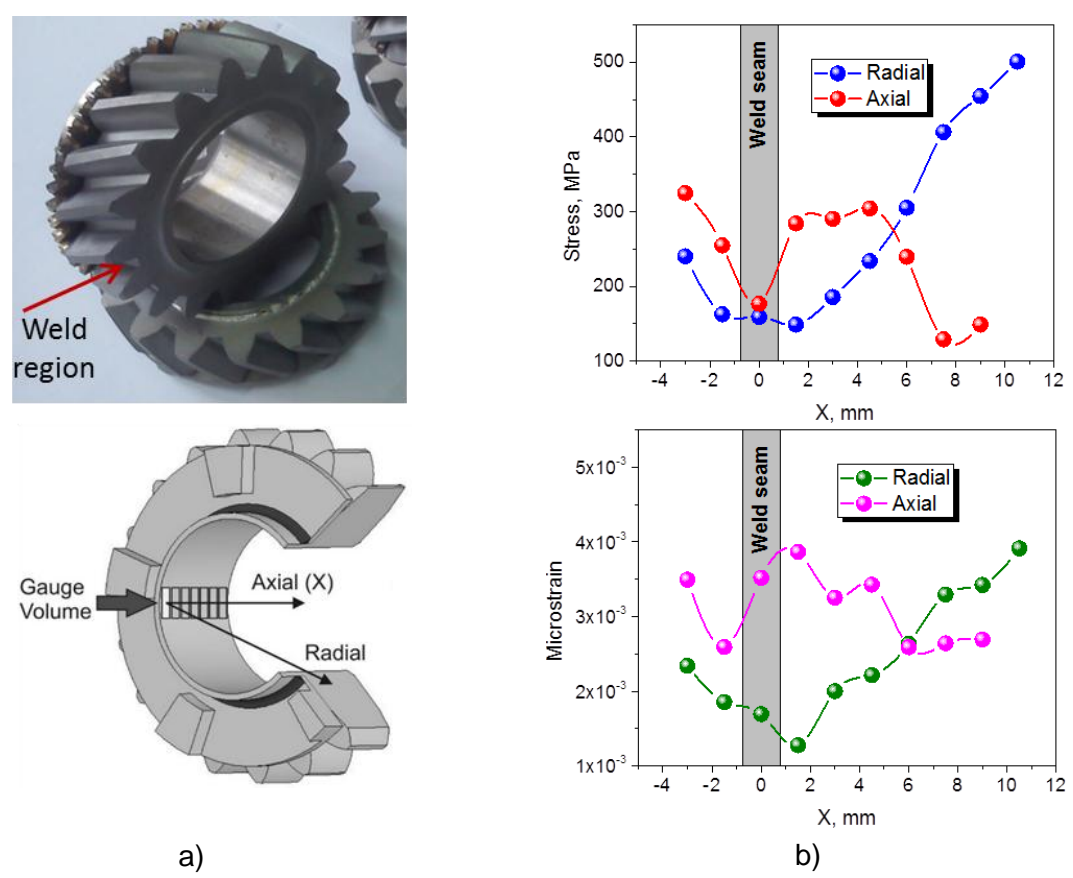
a) Photo of toothed gears welded by electron beam welding and scheme of the measurement of residual stresses in the toothed gear. b) Distribution of residual stresses (top) and microstrains (bottom) in the toothed gear welded by electron beam welding.
